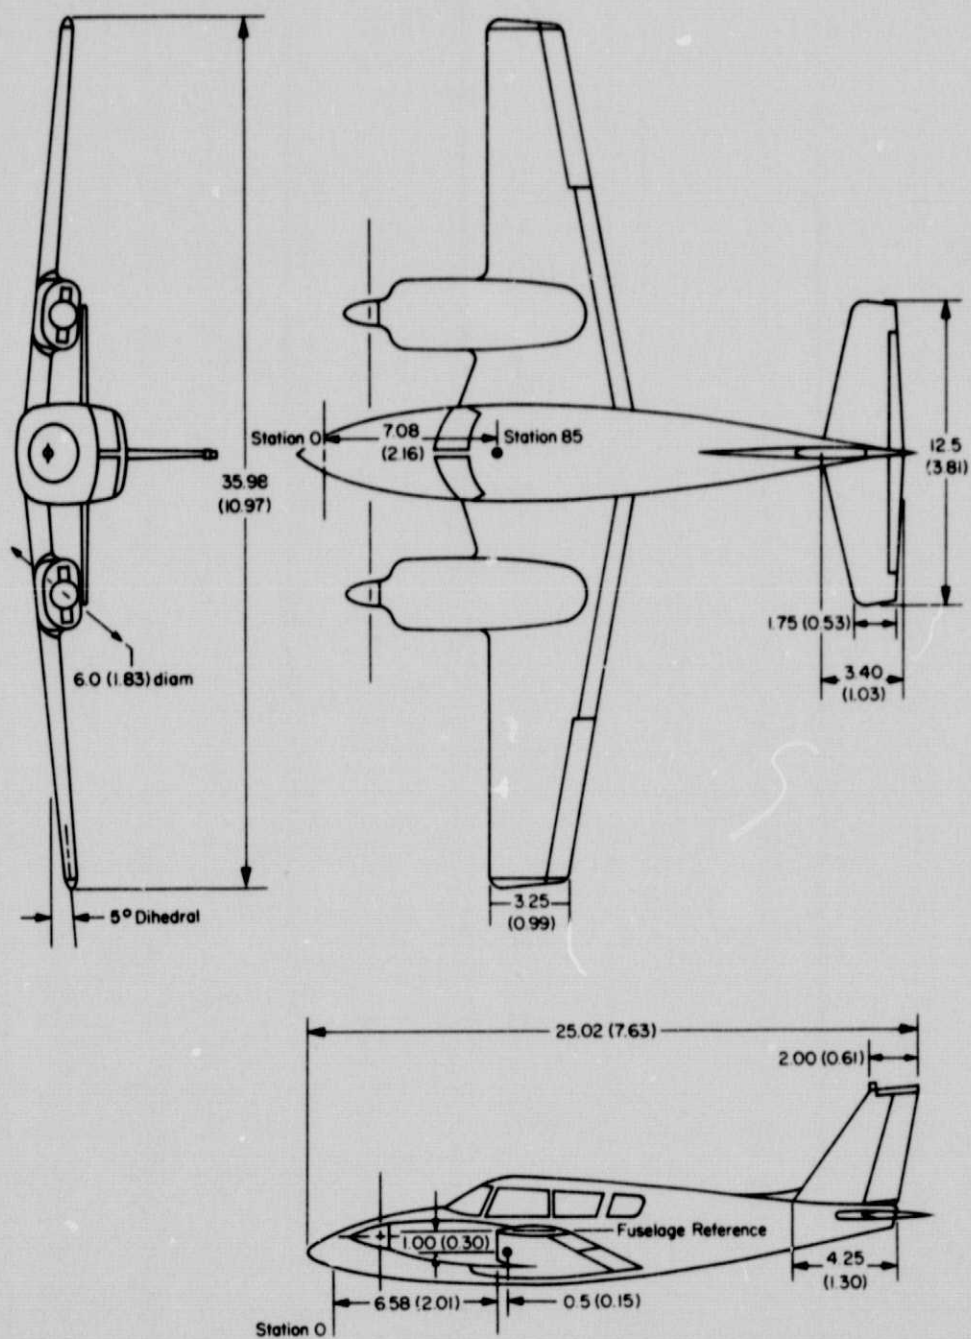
Three-view drawing of airplane. All dimensions are in feet (meters).
